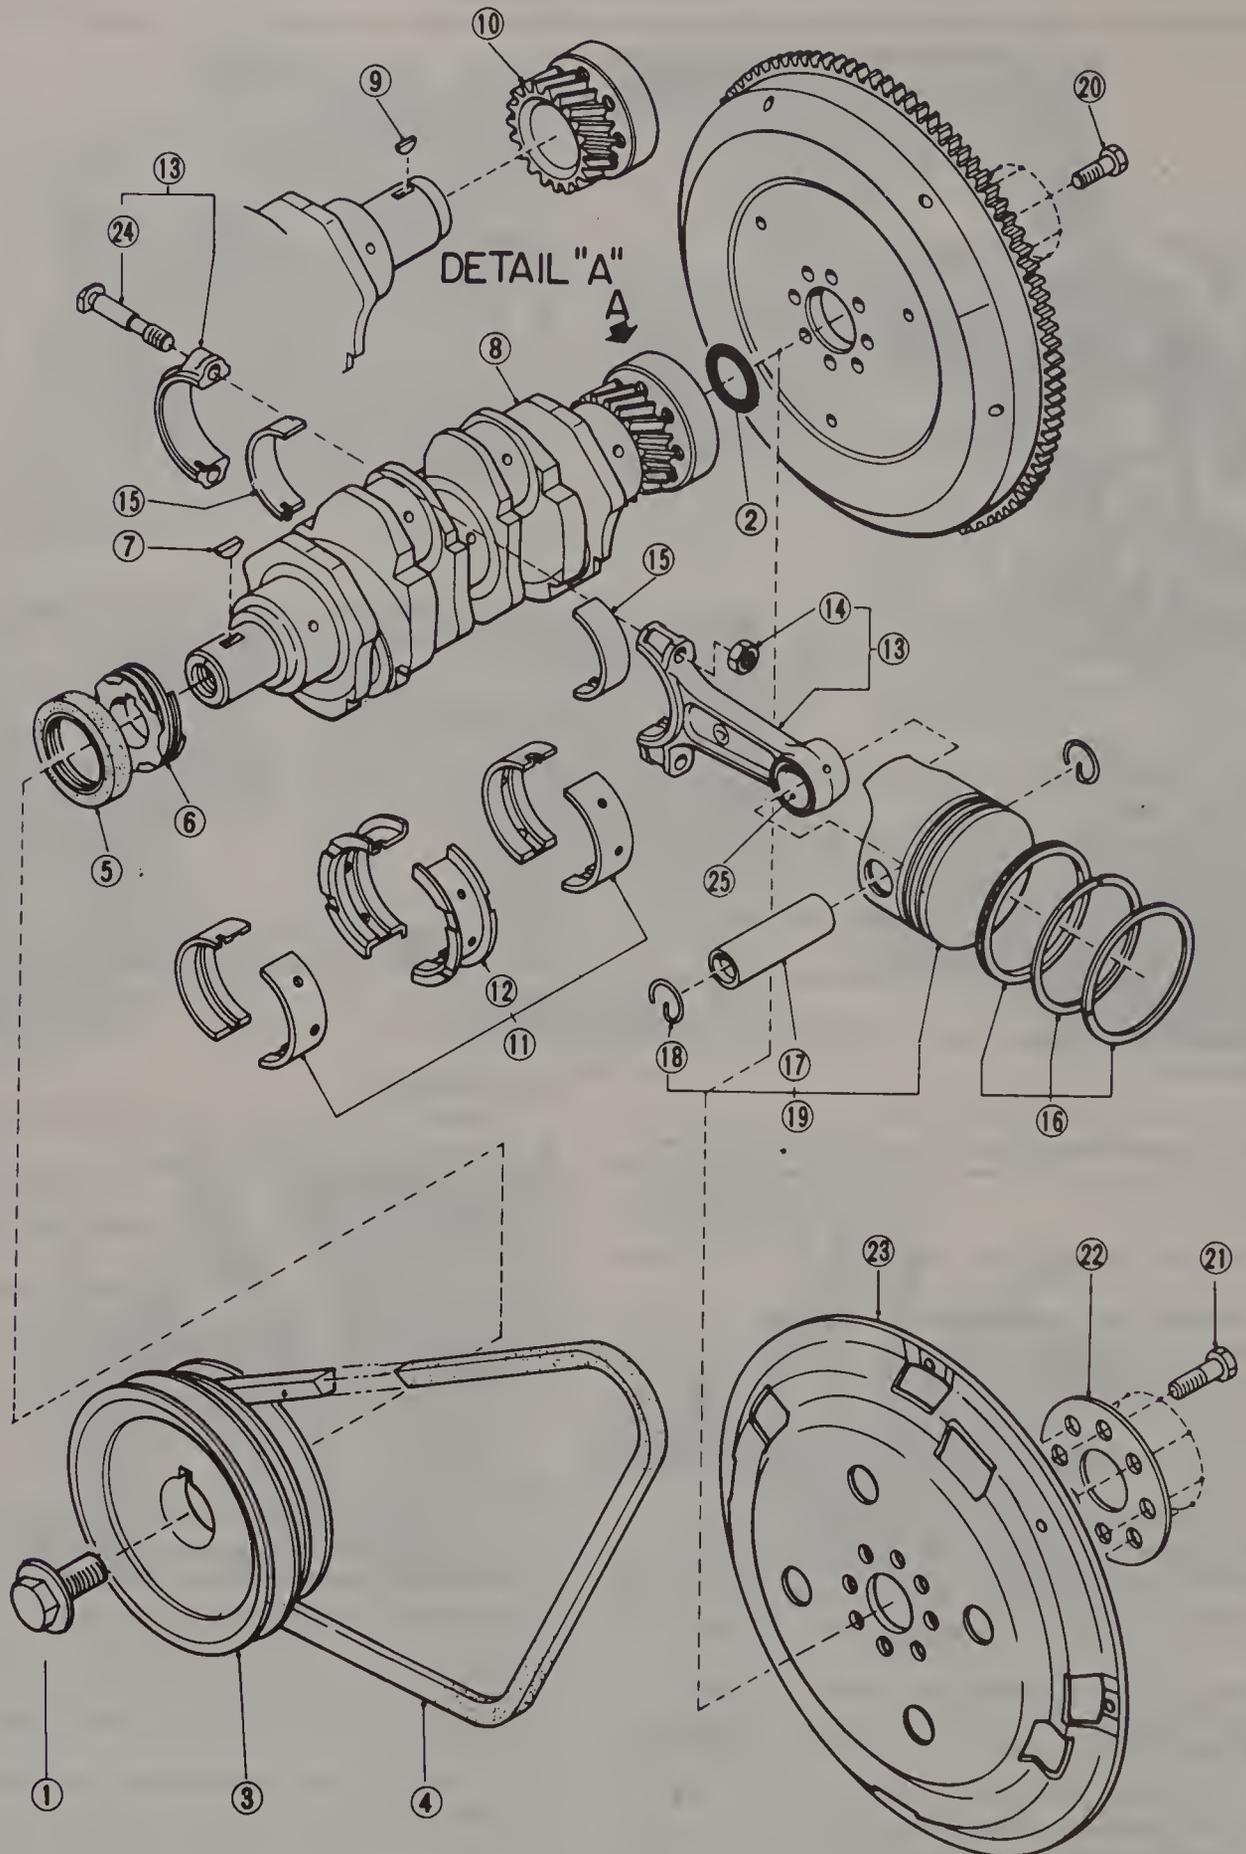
Crankshaft, bearings, connecting rods, pistons and flywheel/driveplate components – exploded view
